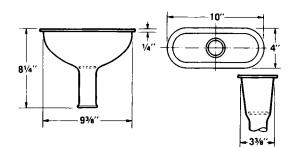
Beaded Outlet 3- by 9-in. Oval
